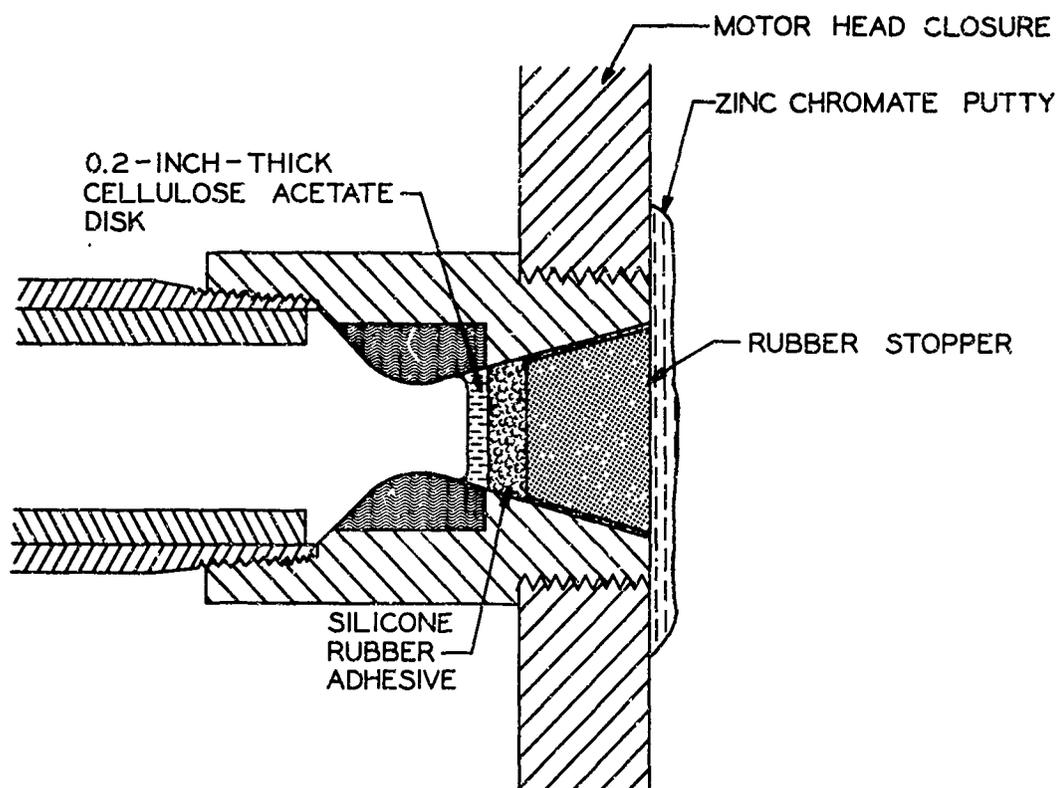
NOZZLE CLOSURE AND SEAL FOR ROCKET-TYPE IGNITER MOTOR.
